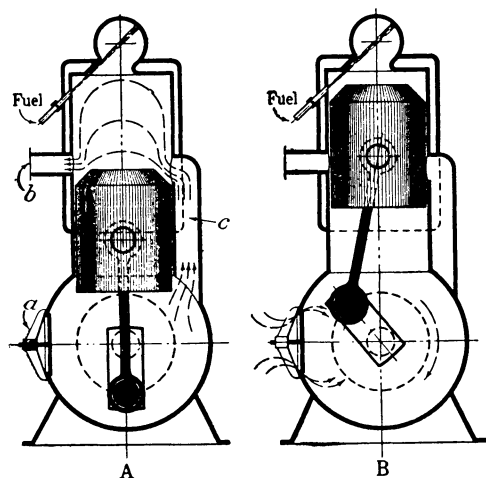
Explosion oil engine, two-stroke cycle.
